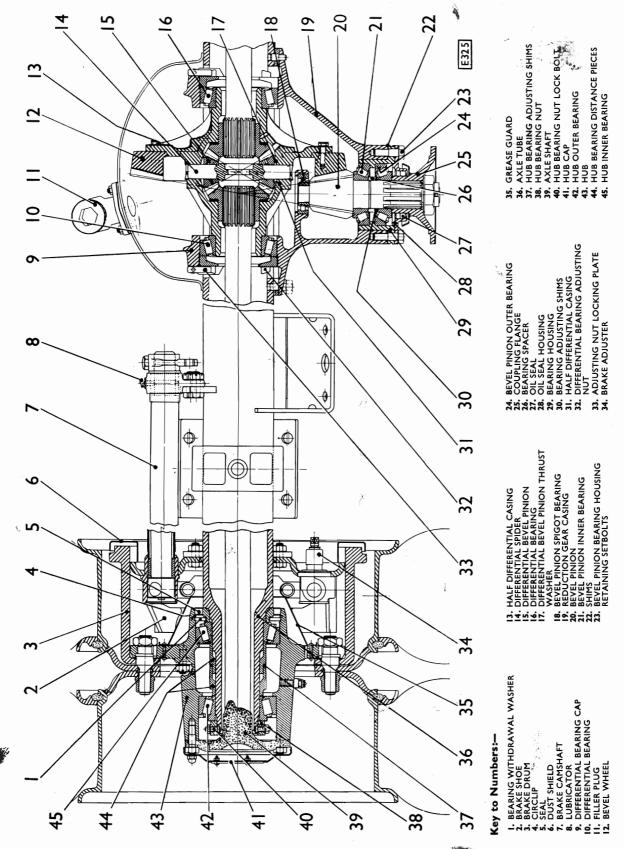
Arrangement of rear axle (early type pinion assembly)
